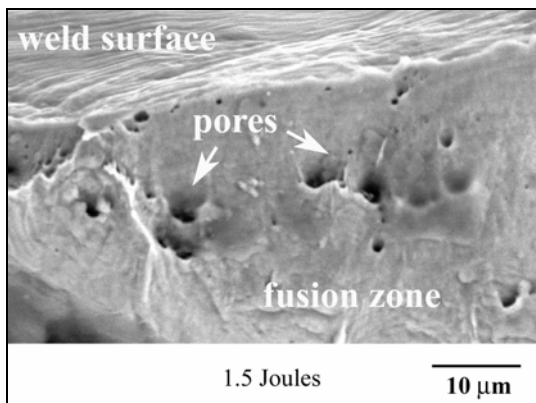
SEM of fractured surface of the specimens welded with 1.5 Joules.
